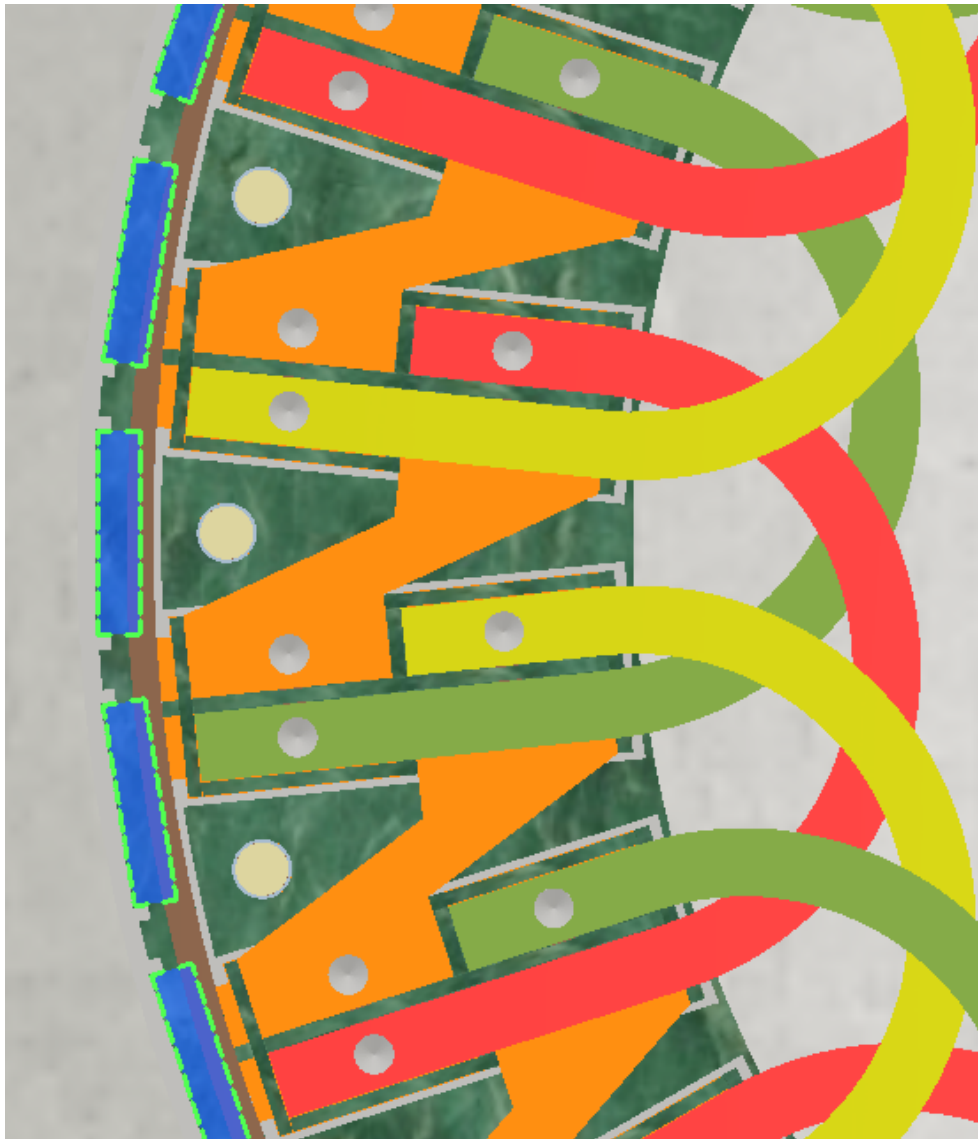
Top view of the stator and rotor. Machine dimensions as described in Appendix B.
